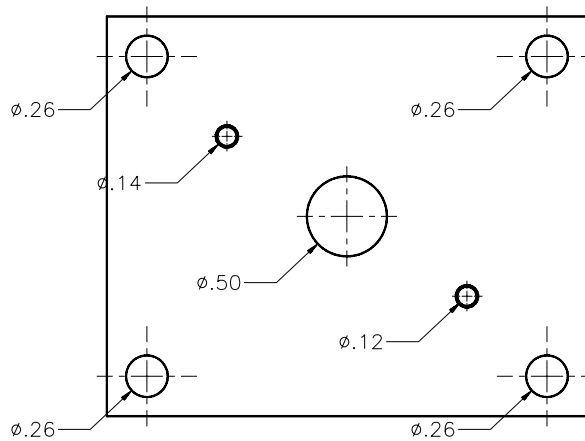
Using the QDIM command to quickly dimension multiple circles
